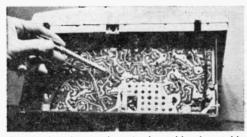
Last but not least in the stable of portable TV troubles is the printed circuit board. Check it for cracks and cold solder joints in the area of the defective circuit, especially around heavy components.
